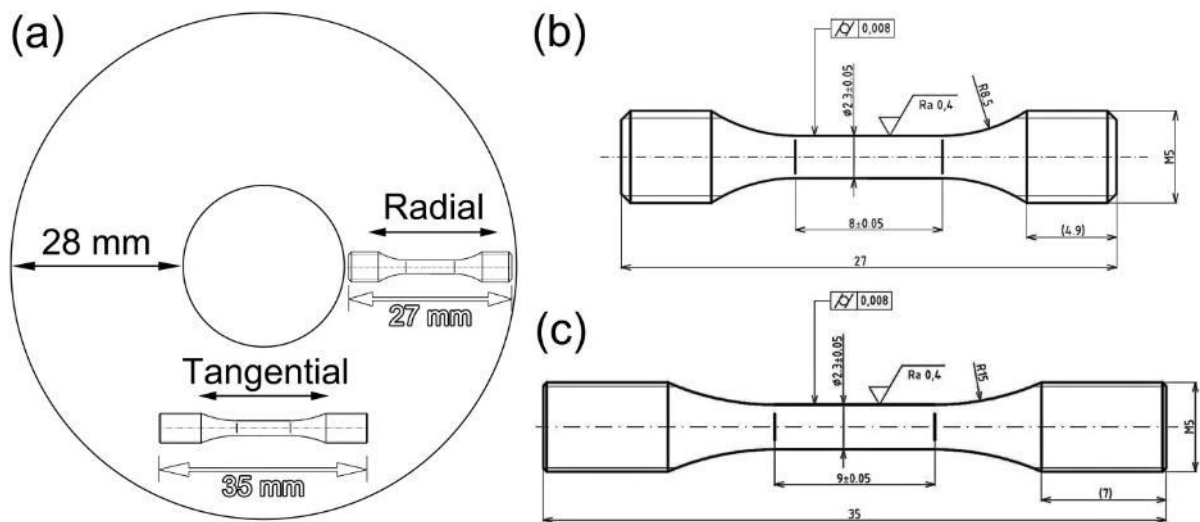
(a) Schematic drawing showing the orientation at which the two types of small samples were produced from the tube wall. (b) Geometry of small sample marked as “radial” produced parallel with the solidification direction. (c) Geometry of small sample marked as “tangential” produced perpendicular to the solidification direction.
